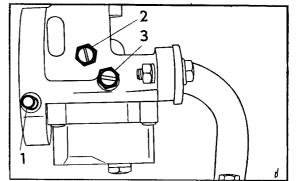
Carburettor 1. Saturator pin. 2. Mover stop screw. 3. Regulating screw for richness of idle run mixture.
